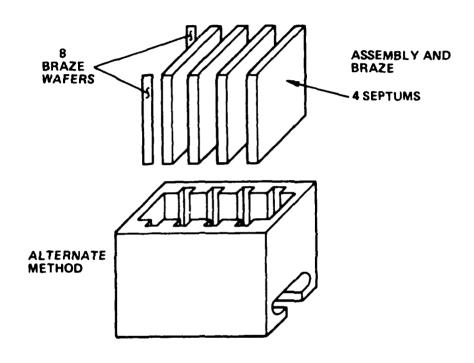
BODY ASSEMBLY - WITH SEPTUMS
